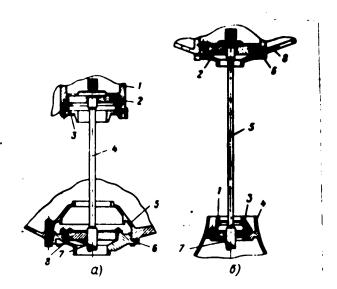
A Device for Checking Coaxiality of Engine Bearing Supports
